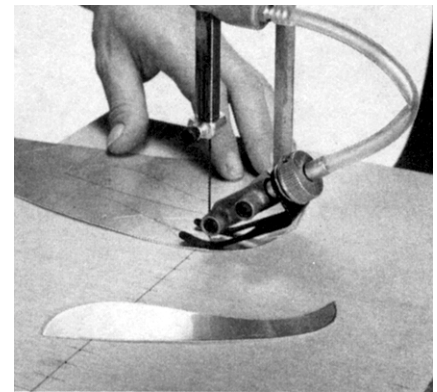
You'll get minimum burring when sawing thin sheet metal if you provide support as close to the cutting area as possible. Here the circle cutting platform is used.
